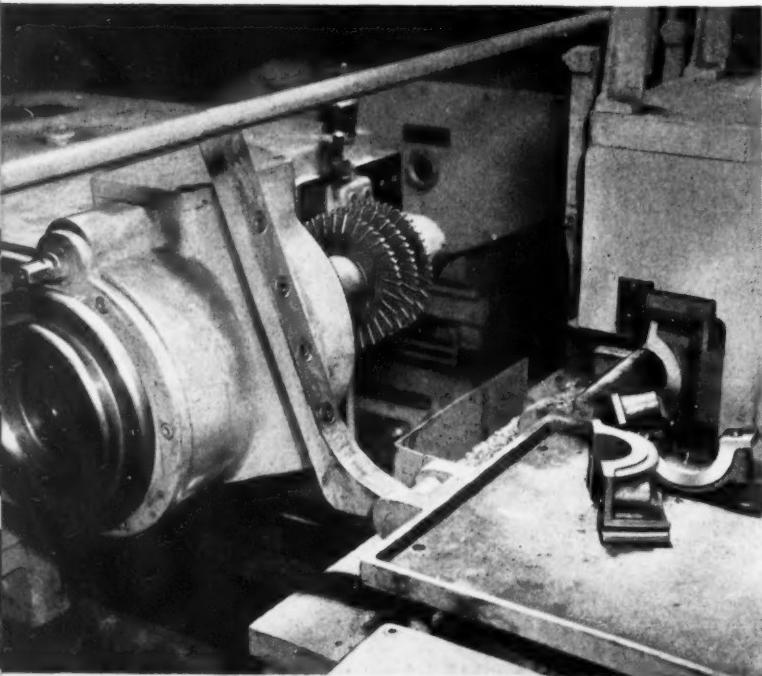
Starting End of a Machine which Performs Drilling, Spot-facing, Reaming, Tapping, and Milling Operations on Bearing Caps
